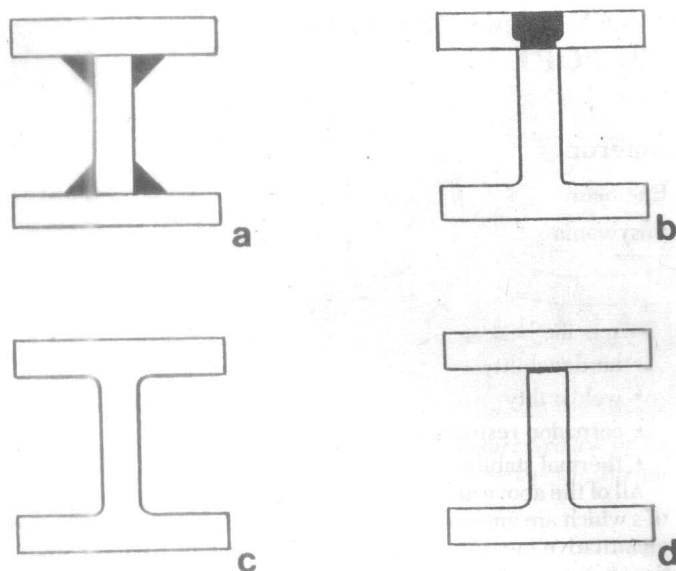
Impeller Constructions. a) fillet welded; b) slot welded; c) integral cast; d) brazed.
